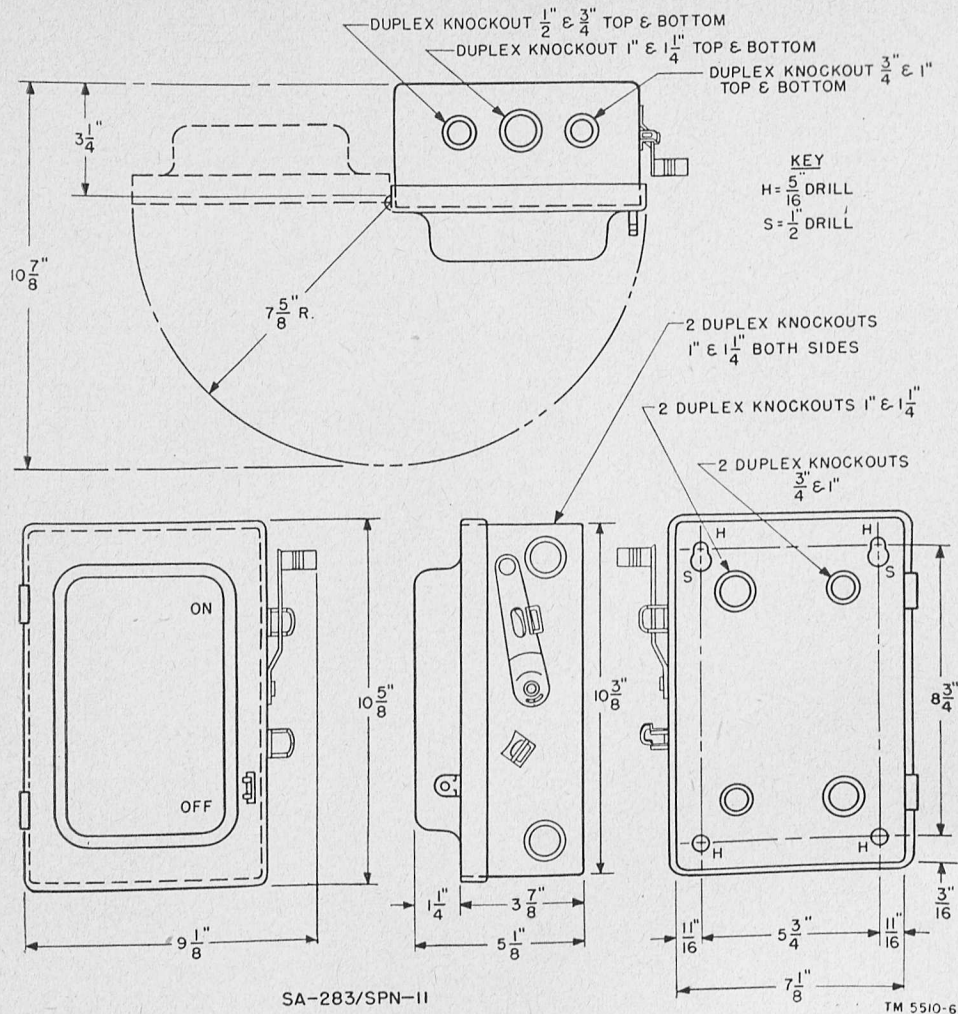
Switch Box SA-283/SPN-11, dimensional drawing.
